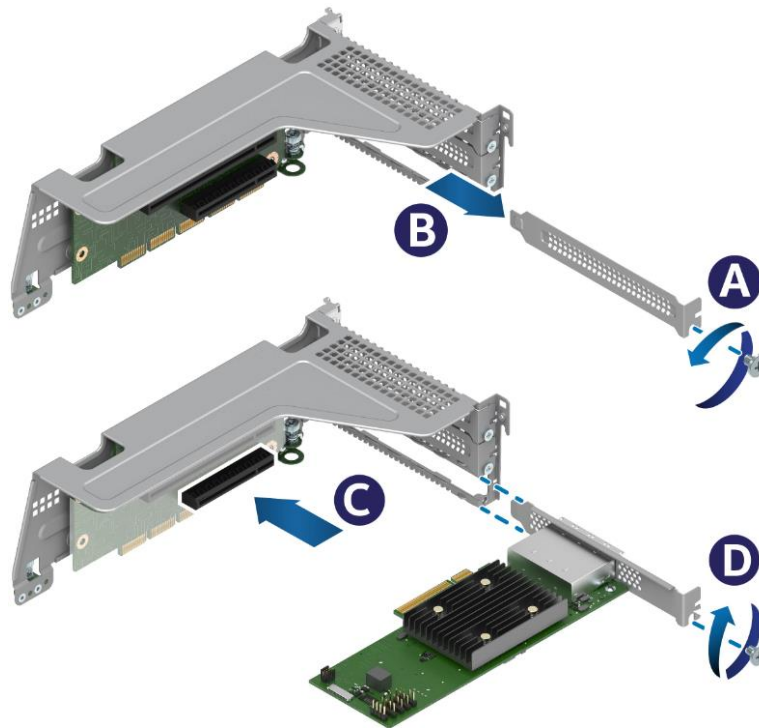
Intel® Storage Adapter Installation (Insert Adapter in Slot)
